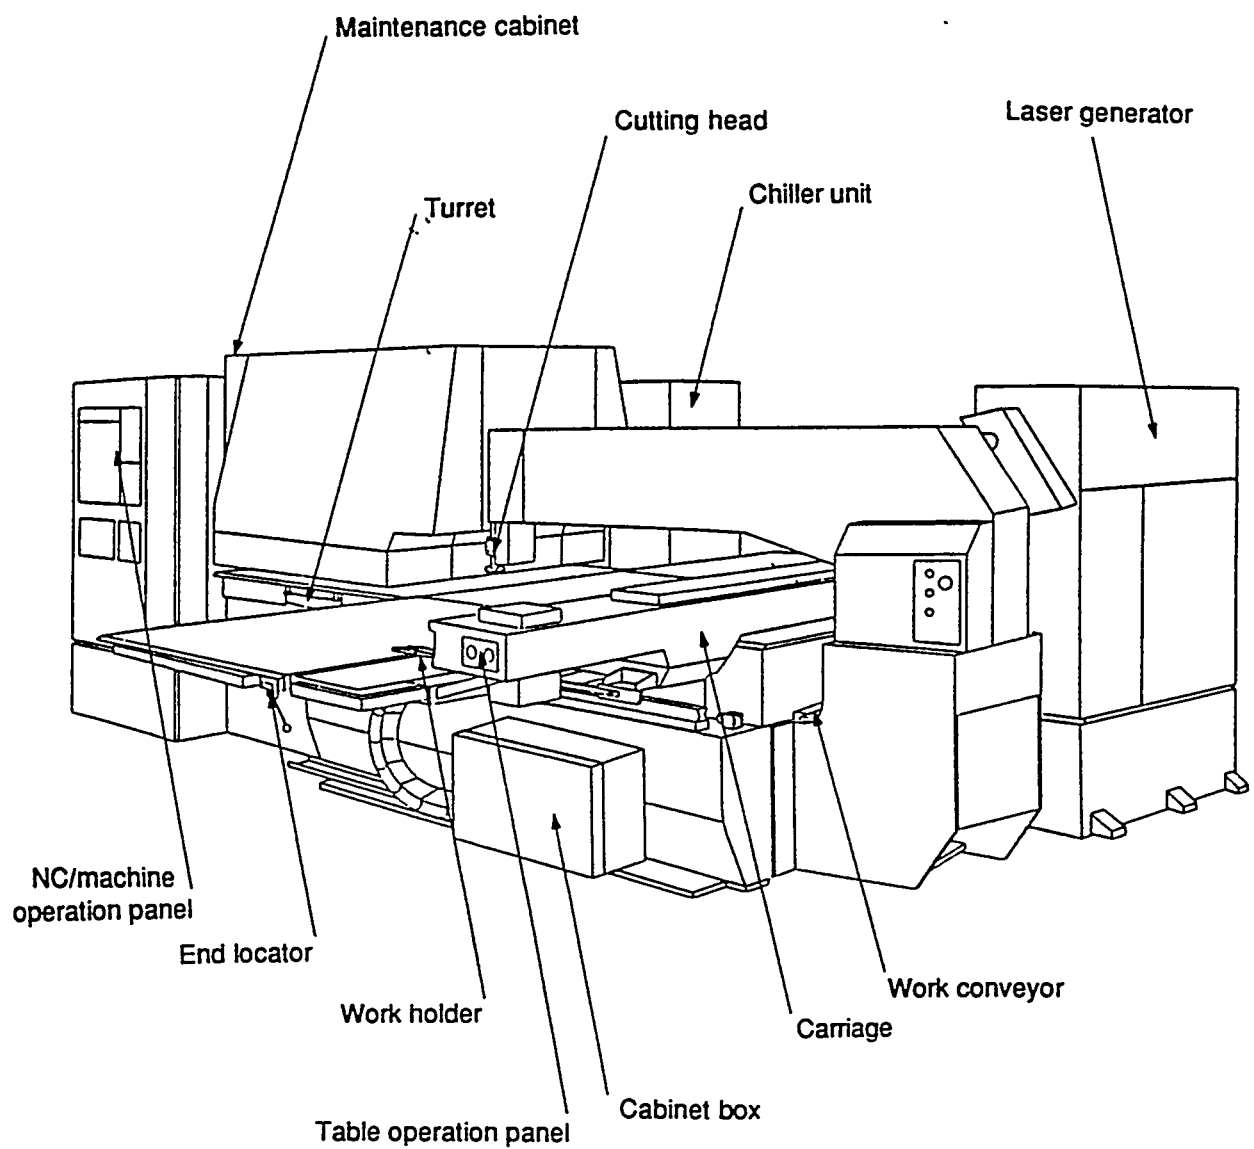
Arrangement of Laser Equipment used to Cut 3mm Aluminum and Steel Plates
